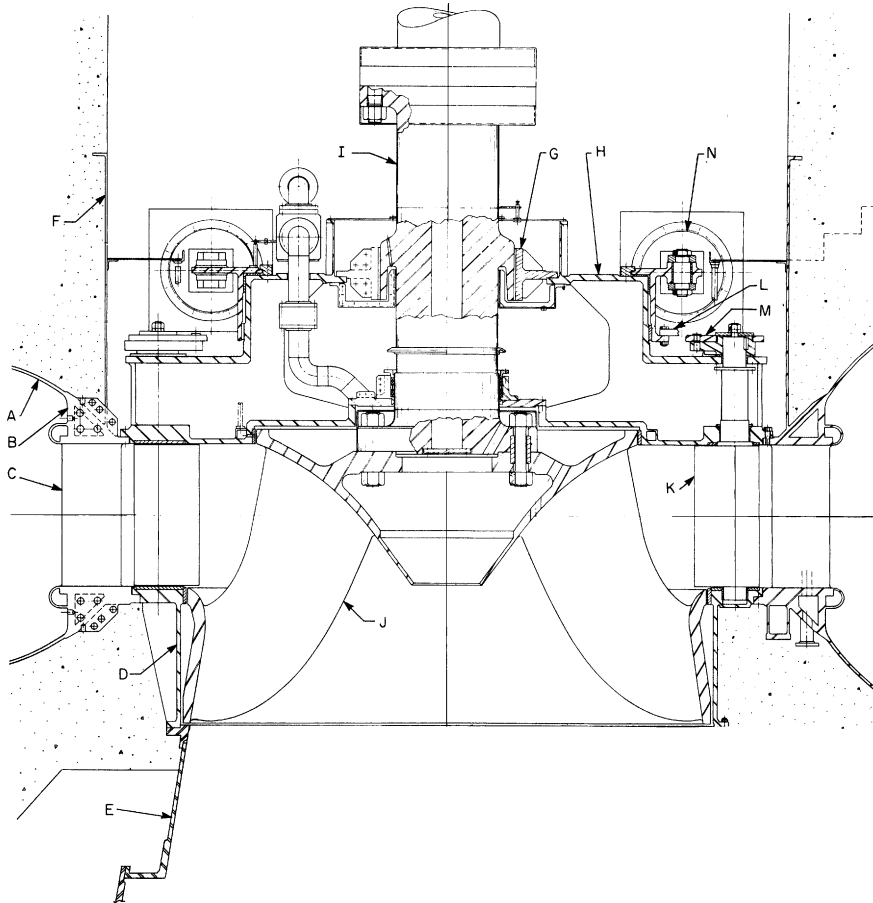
Sectional elevation of a Francis reaction turbine: A—spiral case; B—stay ring; C—stay vane; D—discharge ring; E—draft tube liner; G—main-shaft bearing; H—head cover; I—main shaft; J—runner; K—wicket gates; L—links; M—gate levers; N—servomotors.
